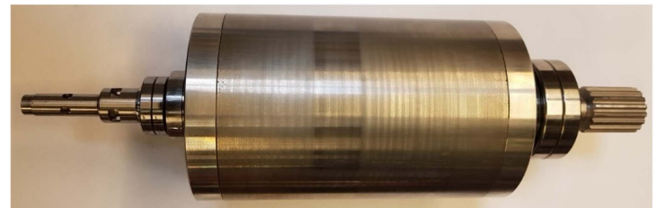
Rotor prototype featuring cooling by shaft Spiral Groove.
